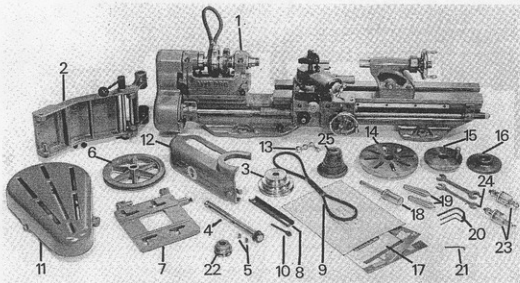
Illustration shows ML.7 Lathe with standard equipment dismantled for packing.
